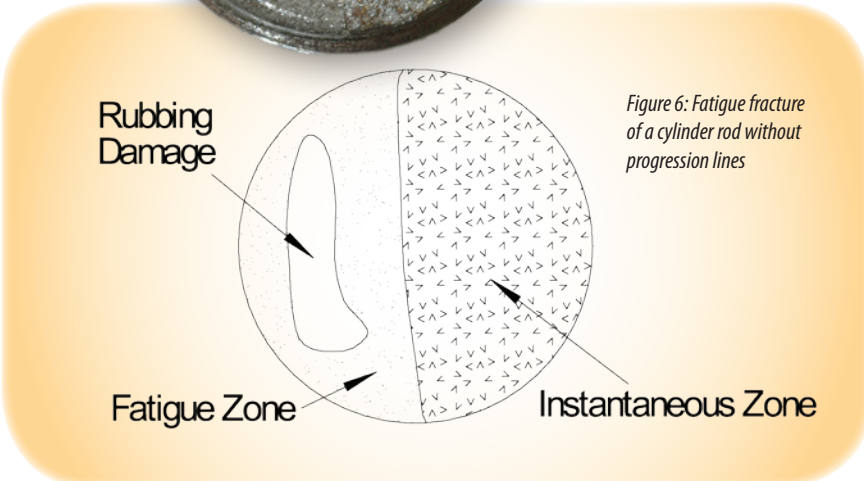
Fatigue fracture of a cylinder rod without progression lines
